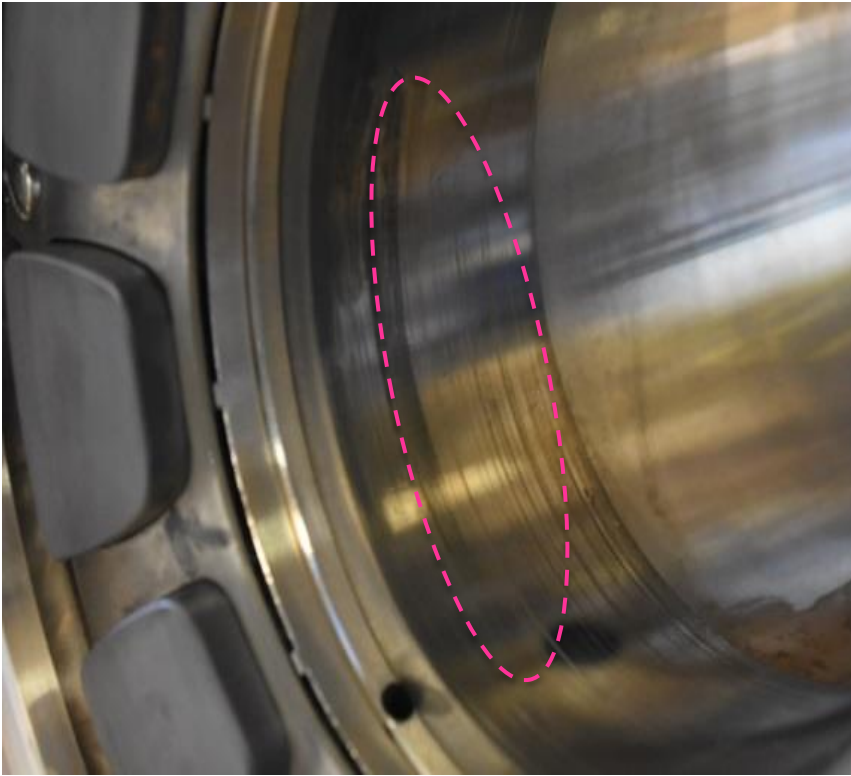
Rub marks post-test on WC journal bearings on turbine side
